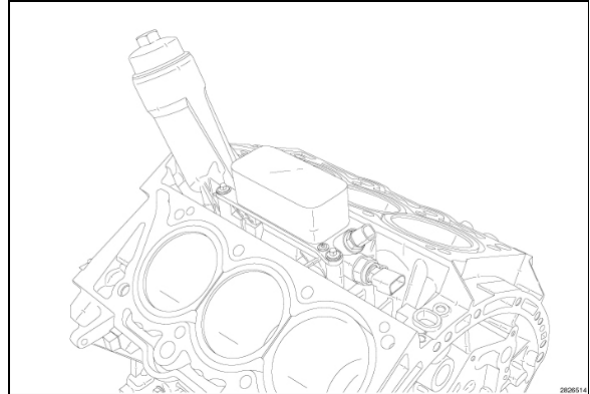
Pentastar Engine Oil Heat Exchanger Location
